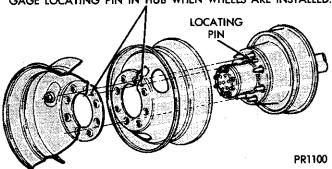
Eight-Stud Hole Dual Rear Wheels
